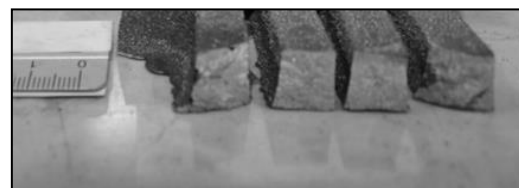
A-F Hot cracking test for 0.33% Al addition to cast iron
